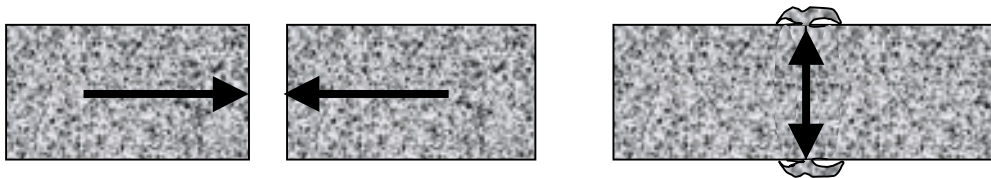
The HF welding process heats only the edges of the strip. The edges are Forced together by the weld rolls causing the molten metal and metal oxides to be ejected. The hot metal below the surface then fuses into a weld.
